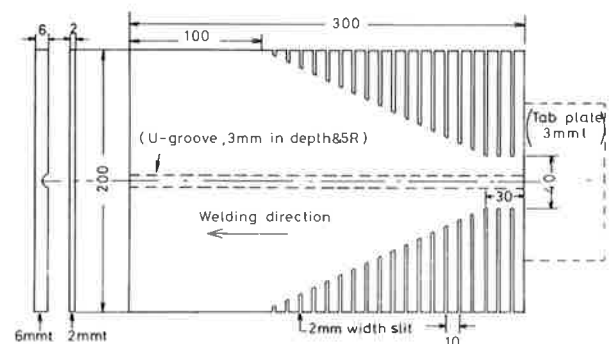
Shape and dimension of modified Houldcroft test specimen for GTA and GMA weldings
